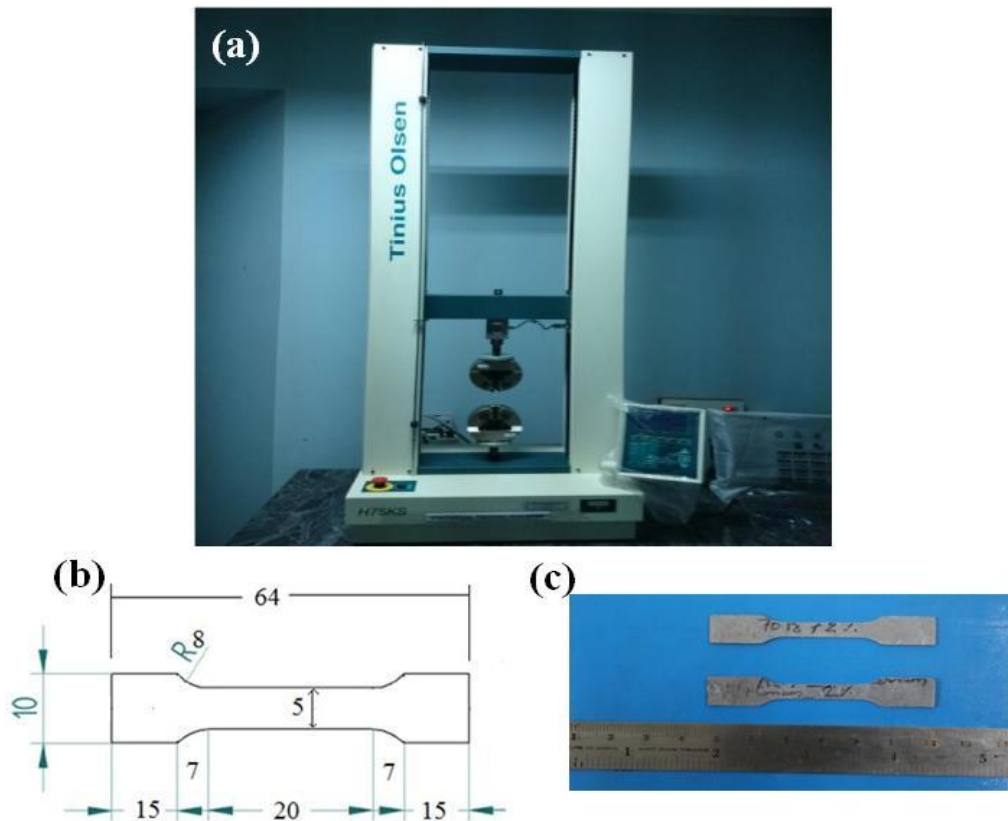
(a) Tensometer (b) ASTM-E8 standard tensile specimen dimensions (c) Tensile samples.
